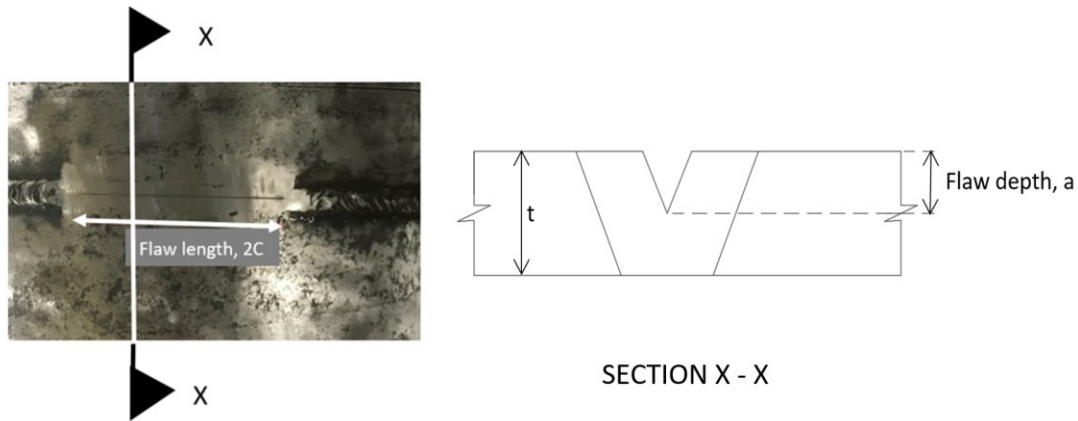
Photograph of the circumferential flaw machined at the WCL
